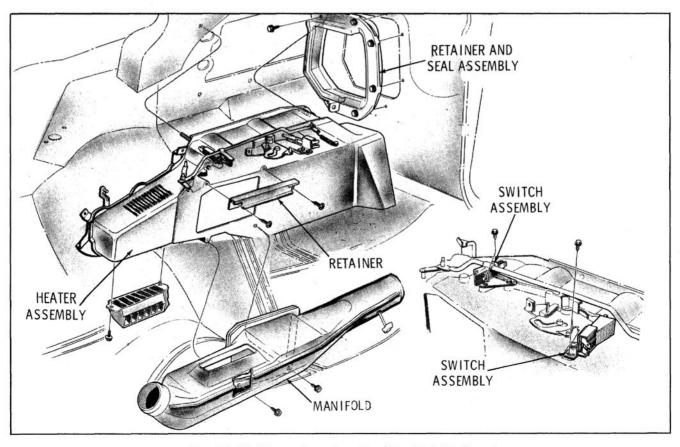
Heater Case Assembly (30 - 31 & 32 Series)
